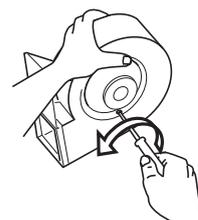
The impeller is removed from the fan housing by unscrewing the screws on the side of the fan housing.
